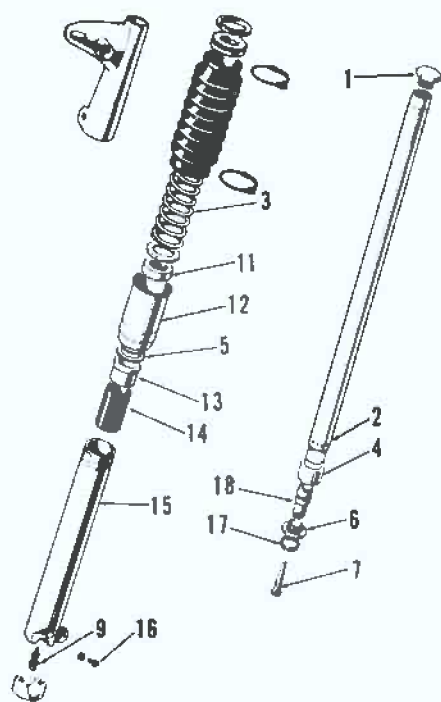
Exploded view of front suspension unit used on models from serial number DU66246.
